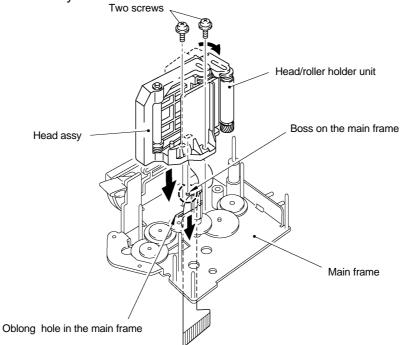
Reassembly of the Head/Roller Holder Unit
